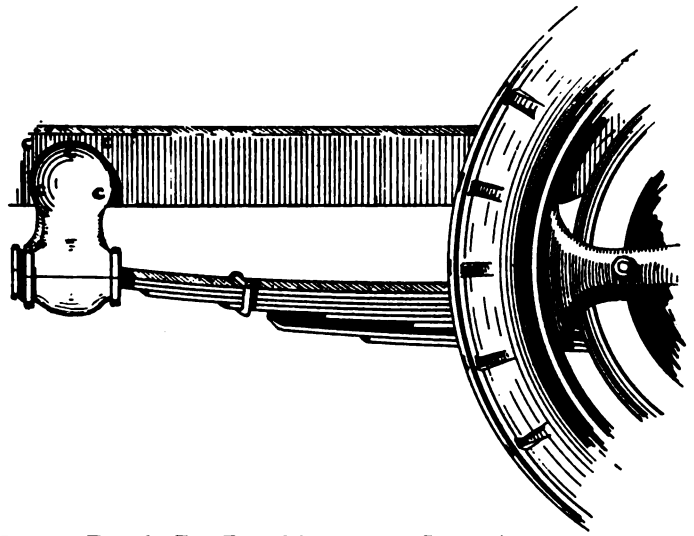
THE TYPE-J PROGRESSIVE SPRING ARRANGEMENT
